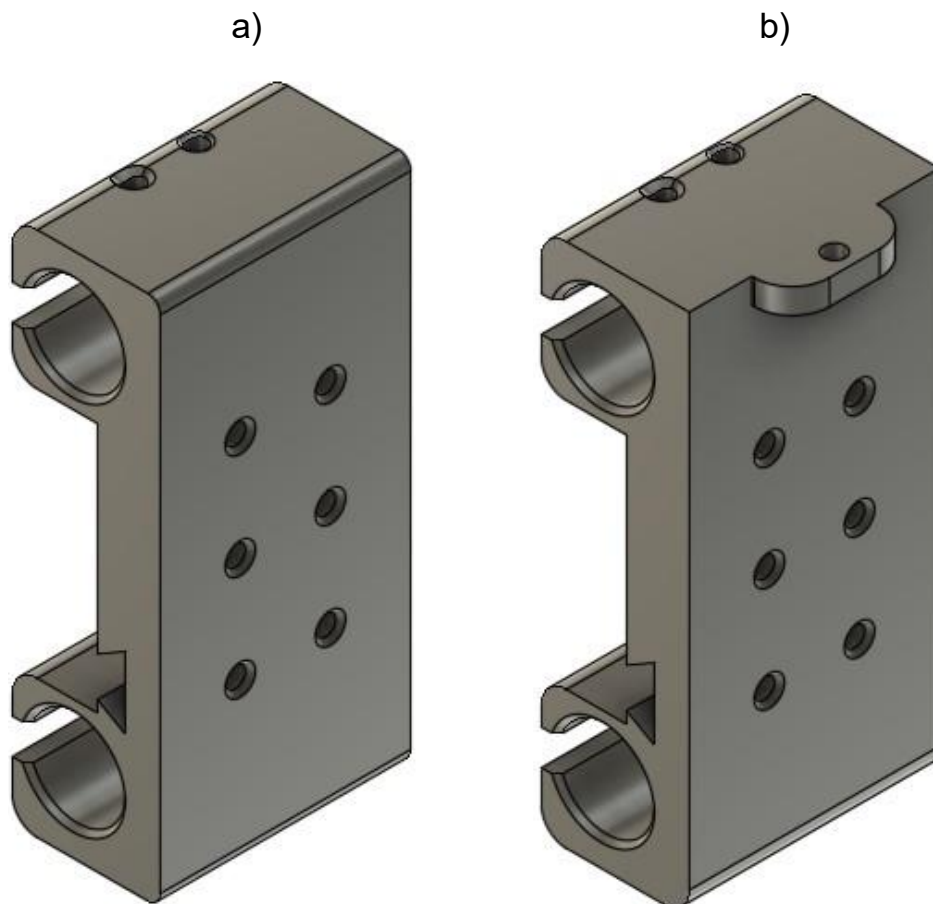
a) Extruder carriage for the primary extruder mount, b) extruder carriage for the secondary extruder mount.
